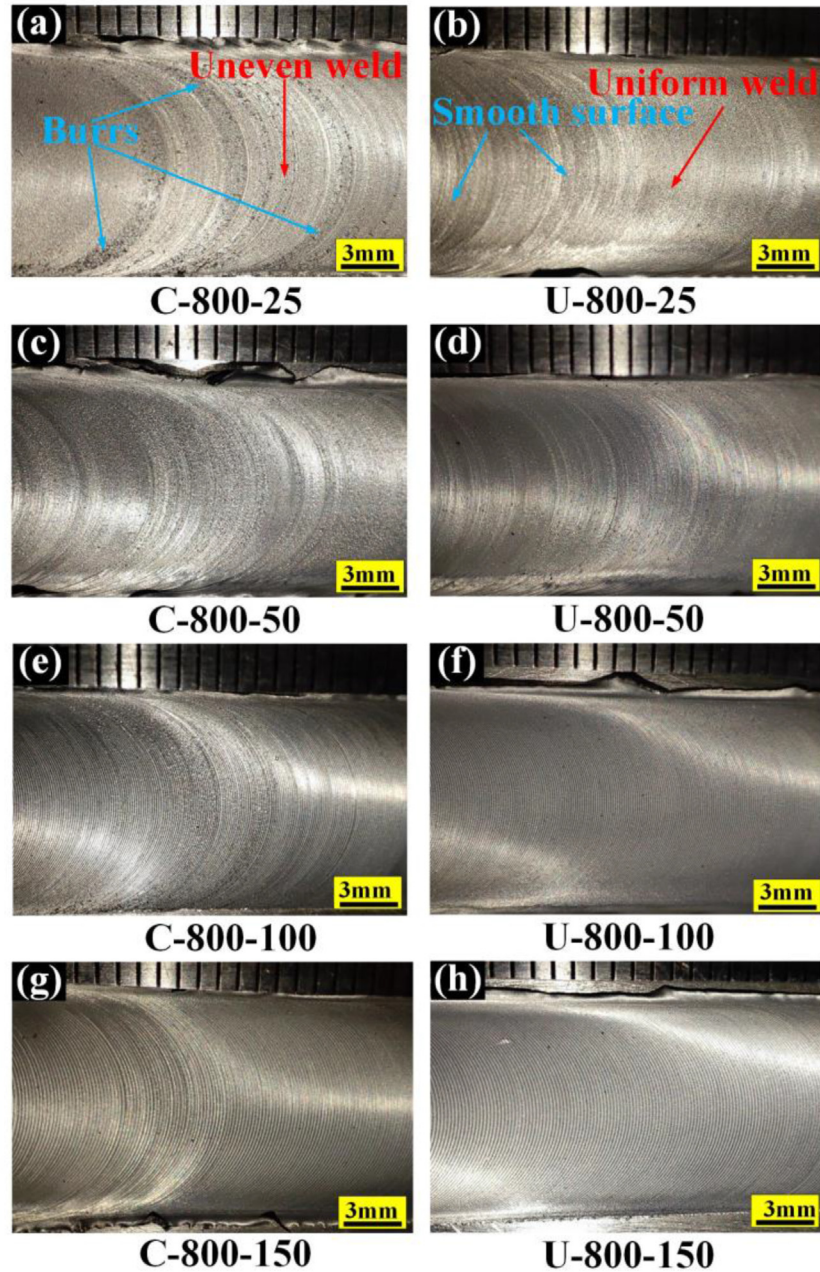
Weld surface appearance at different welding speeds.
